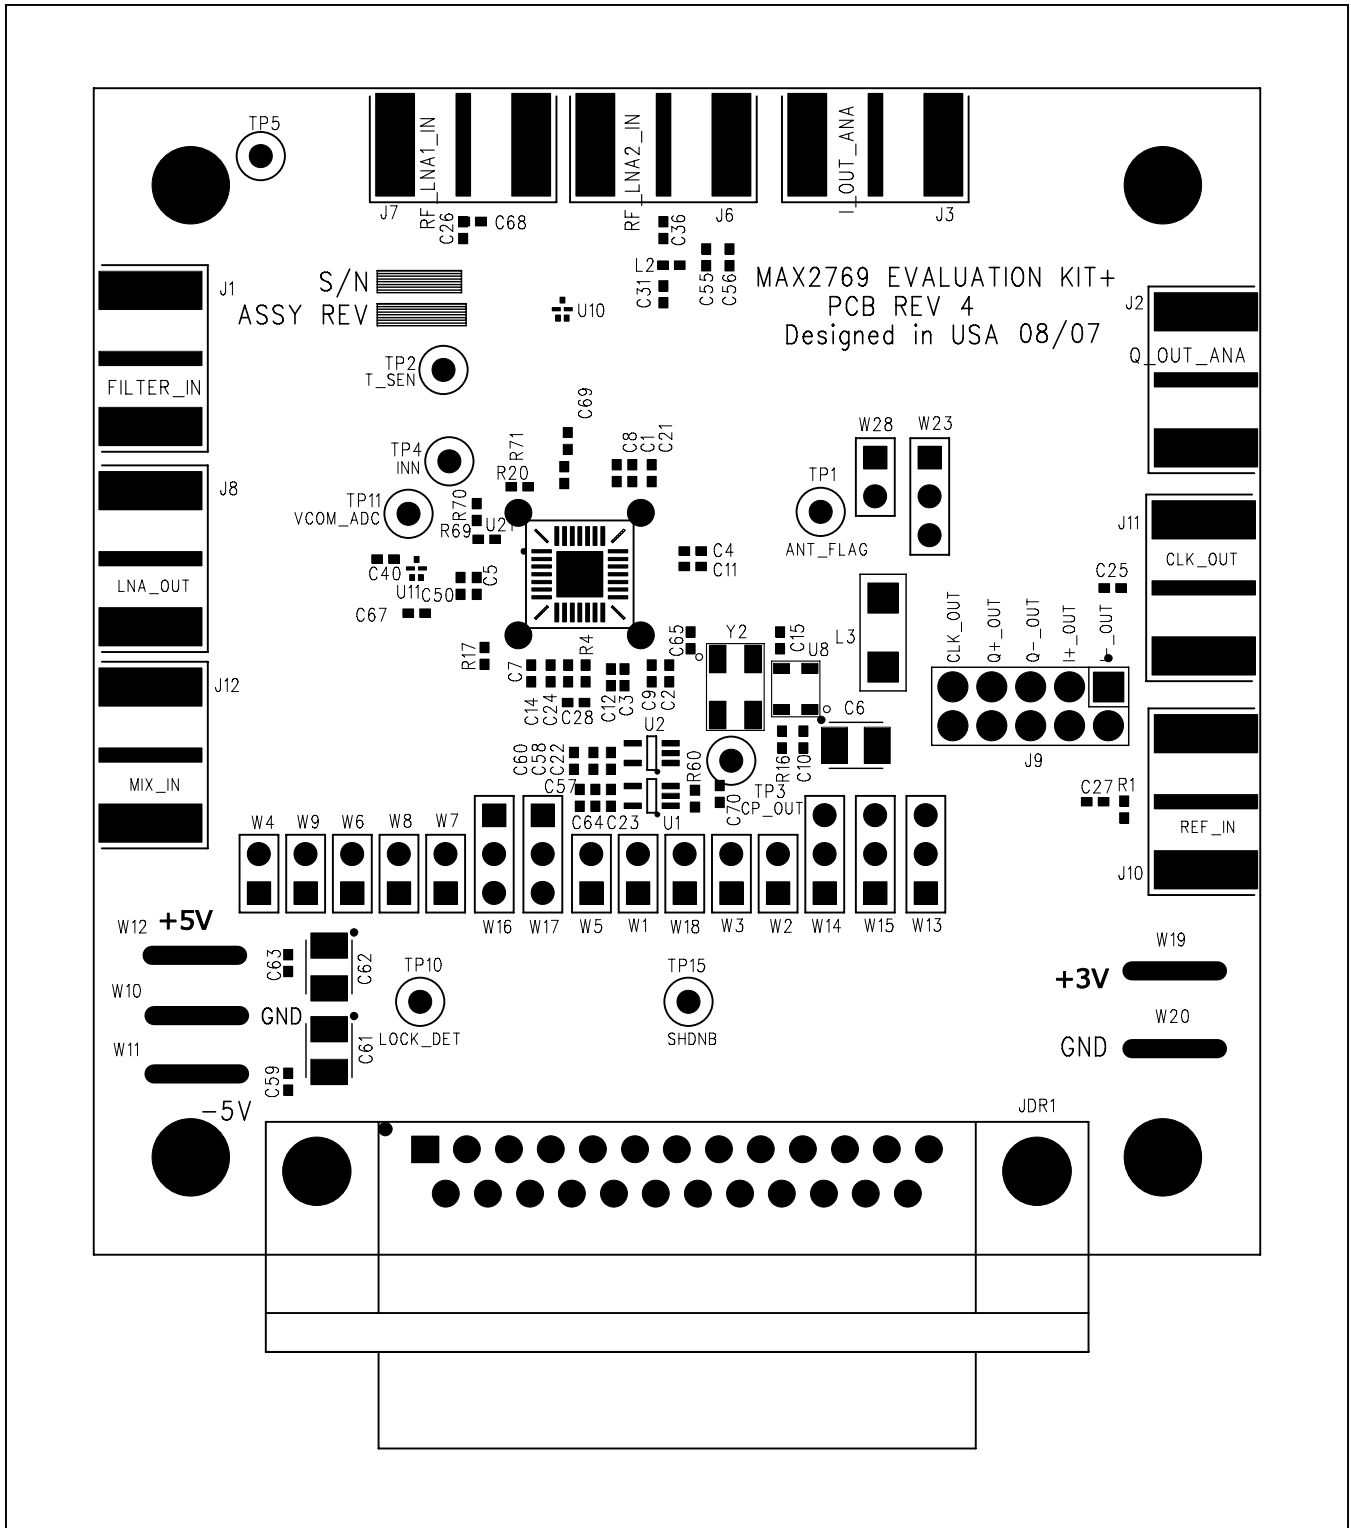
MAX2769/MAX2769B/MAX2769C EV Kit PCB Layout—Top Silkscreen
